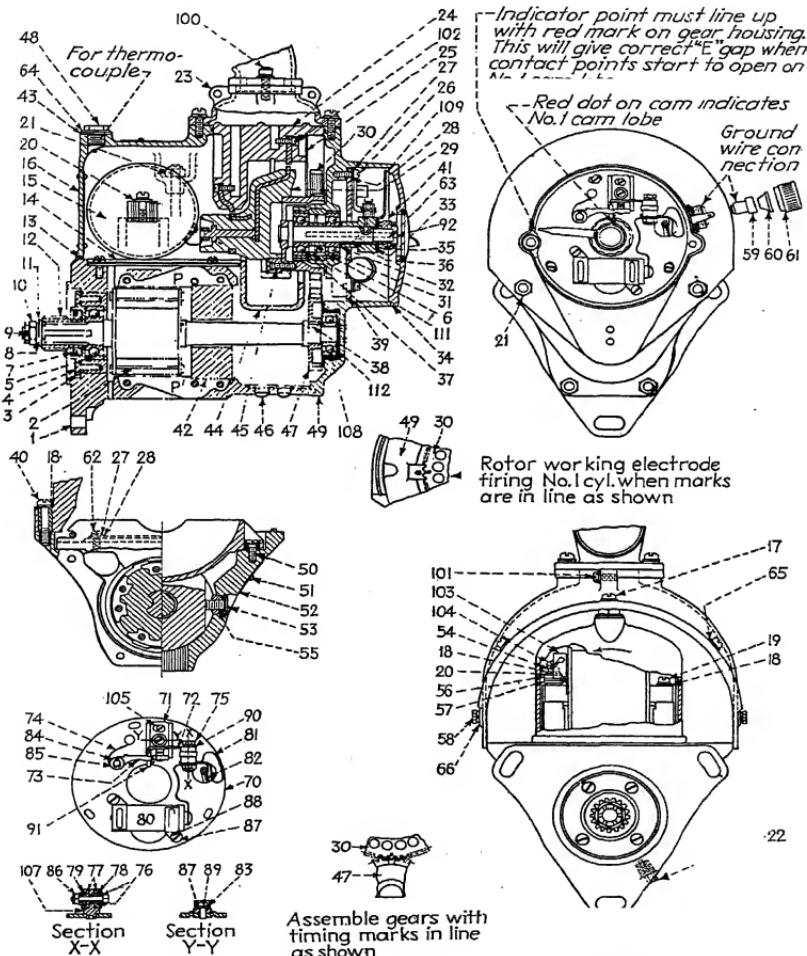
Details of American Bosch type SF14LU-6 magneto.
